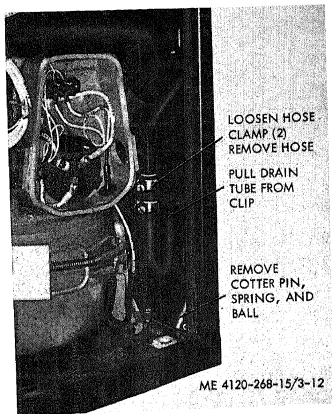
Drain tube, removal, disassembly, reassembly and installation.
